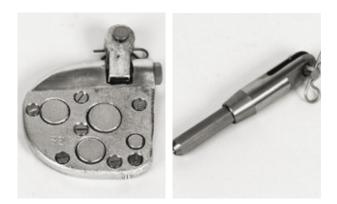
Connectors for attaching sounding cable to sounding-weight hanger; type B (left) and pressed sleeve (right)
